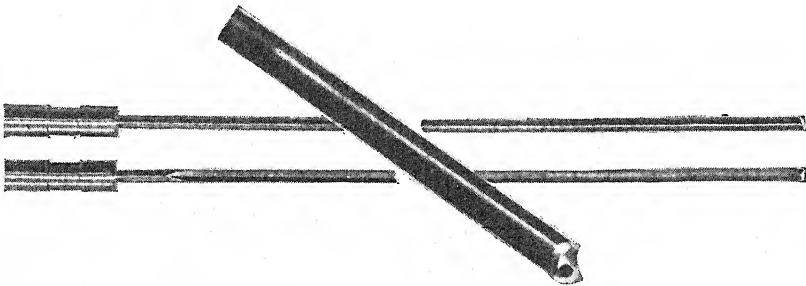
Typical Single-Flute Oilhole Drills Used in the Pratt and Whitney Deep-Hole Drilling Machine.
